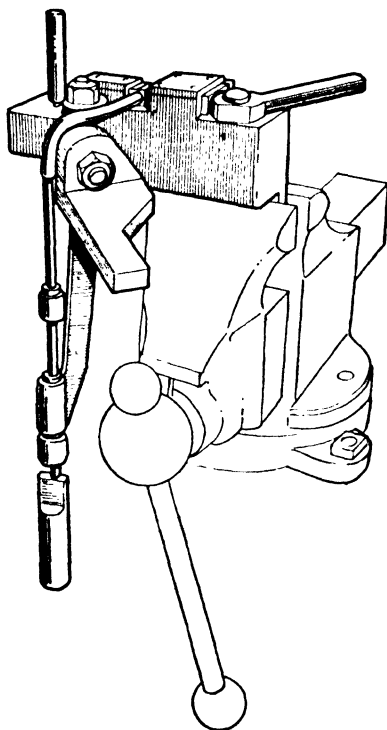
This pipe is bent in two places. A different fixture is used.
